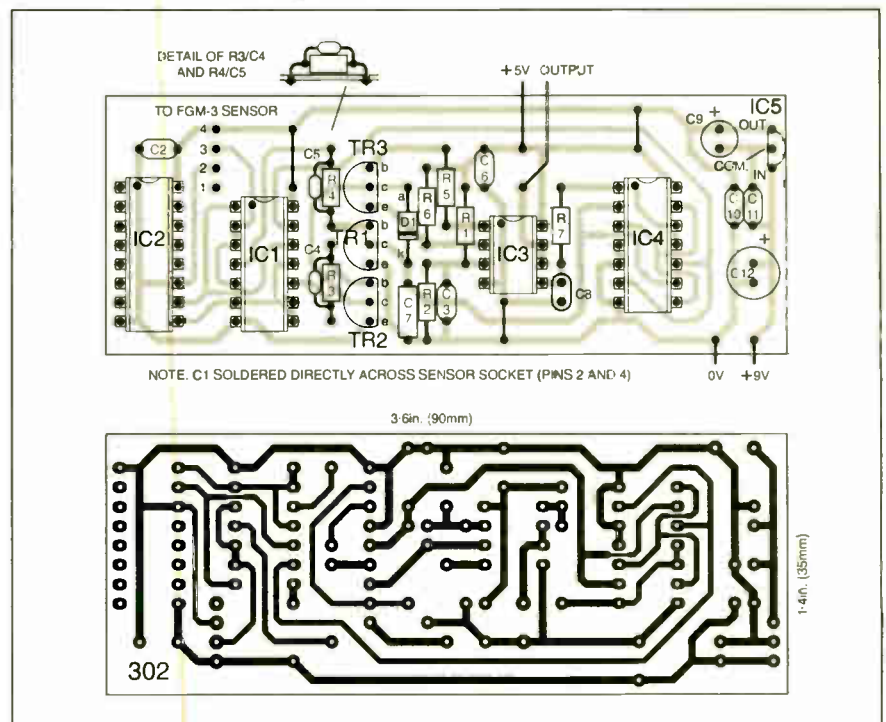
Printed circuit board component layout and underside copper foil master for the sensor board.
